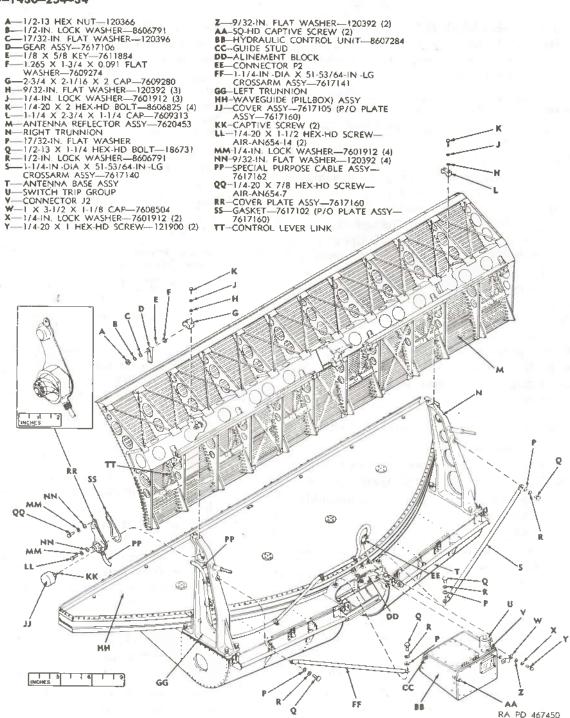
Removal and installation of antenna reflector assembly 7620453.
